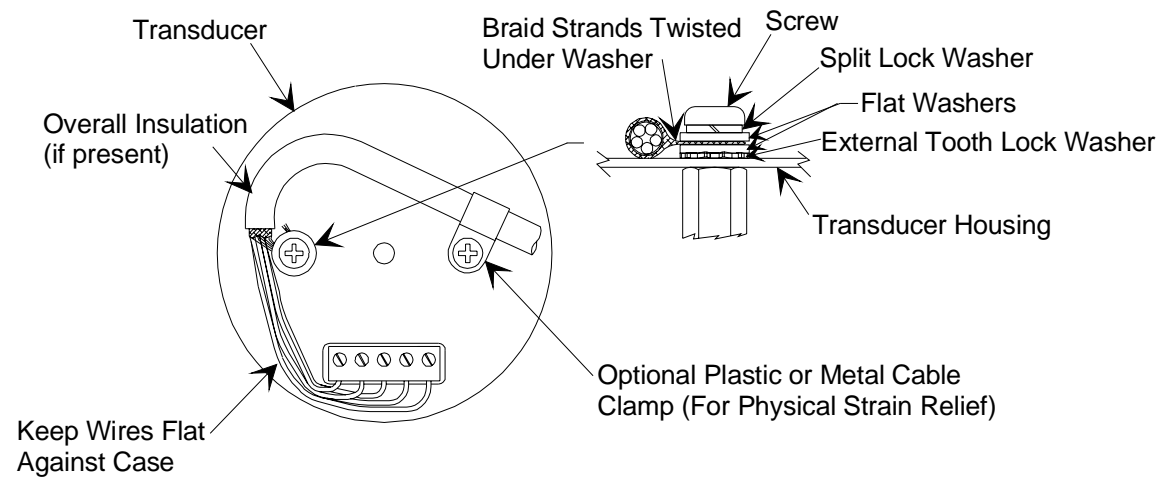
Alternate Method To Connect an Overall Metal Braided Shielded Cable
